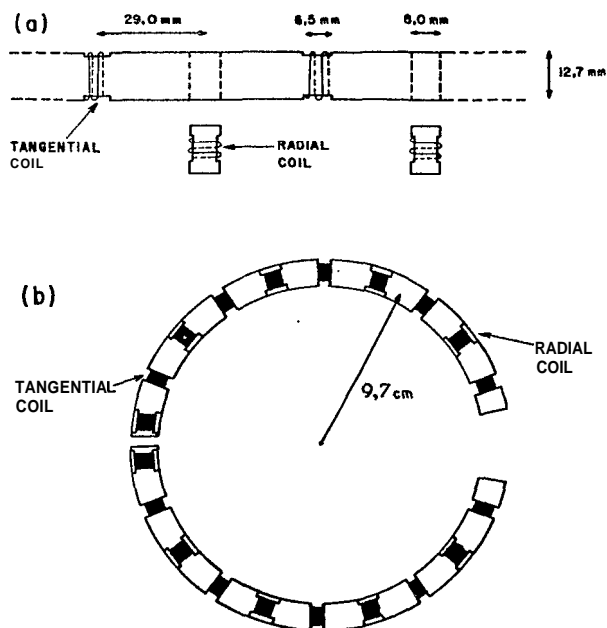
Sketch of the tangential and radial pick-up coils and the assembling scheme (a) and the two bent nylon tubes before insertion in the supporting metal tubes (b).
